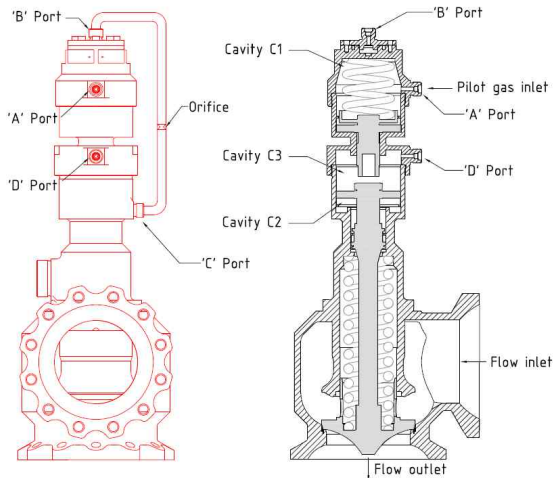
Principal ports and cavities in the actuator and the pneumatic part of the two-step poppet valve
